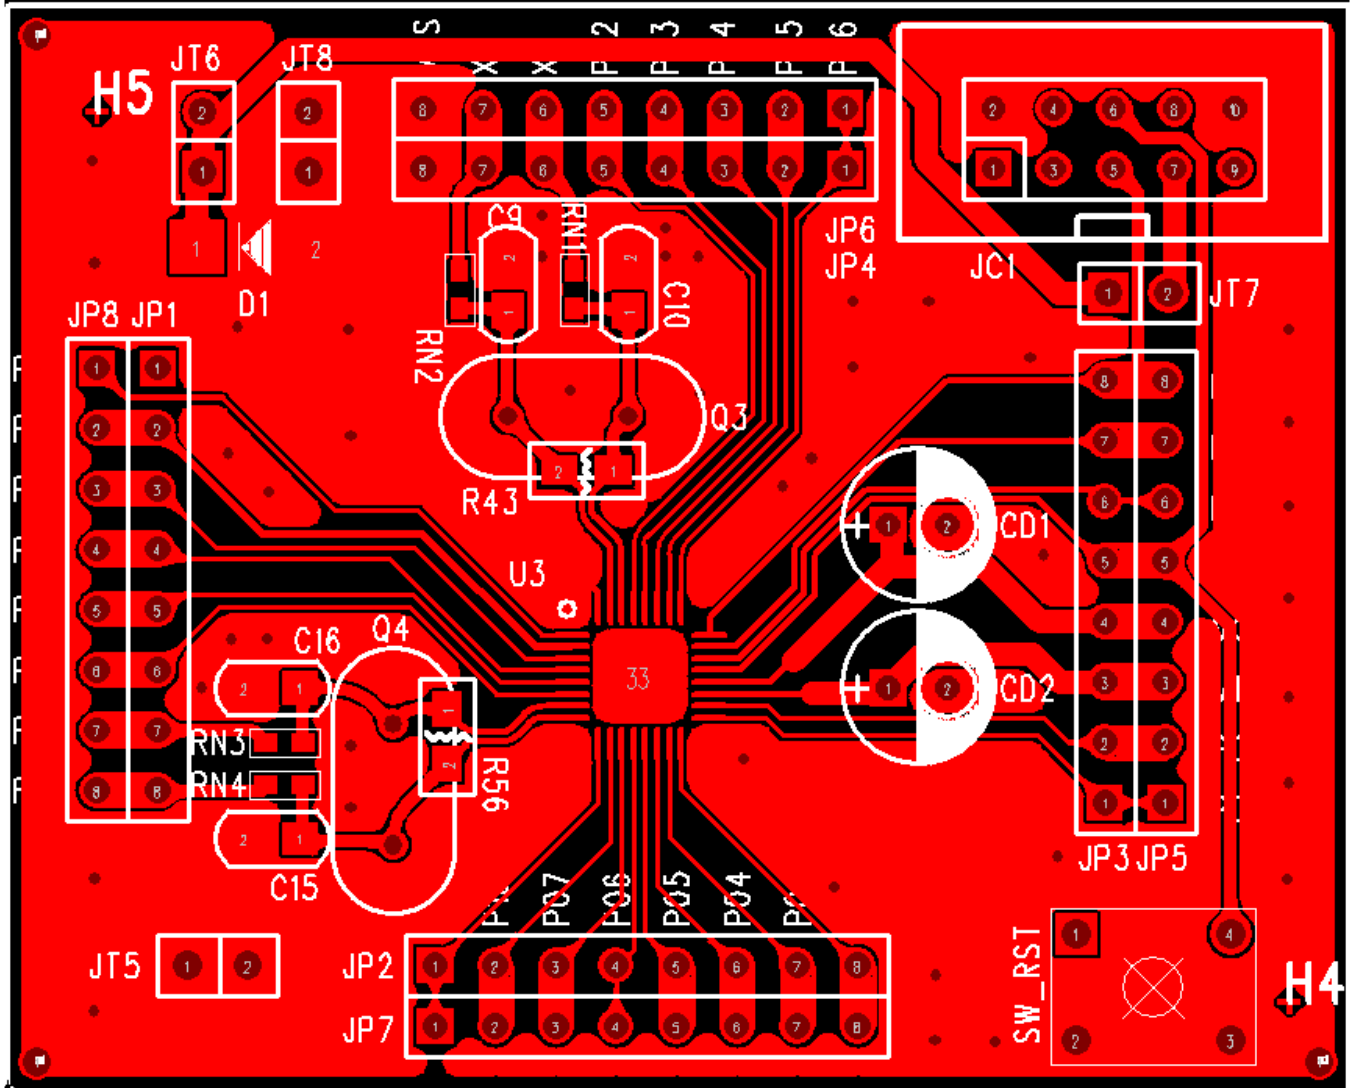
IS31CS8964 Evaluation Board PCB Layout - Top Layer
